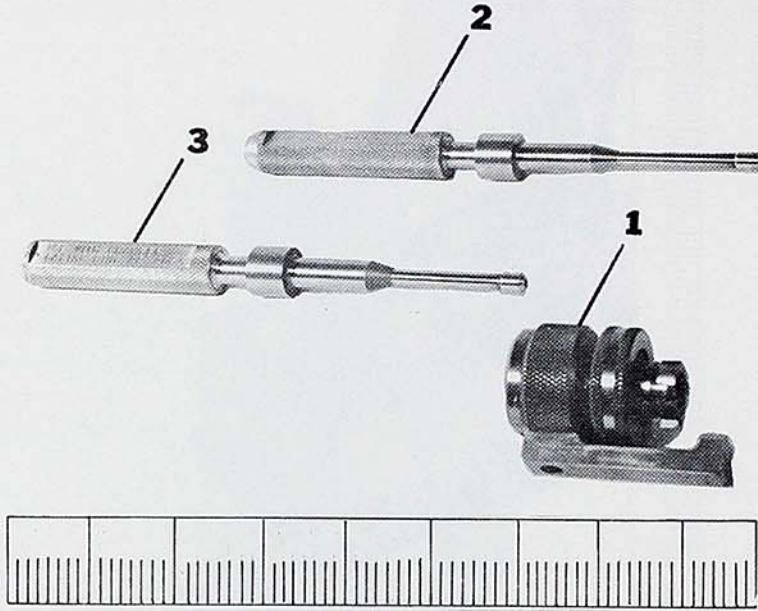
Gage Ring, Second Shoulder Depth Gage, and Bullet Depth Gage.
